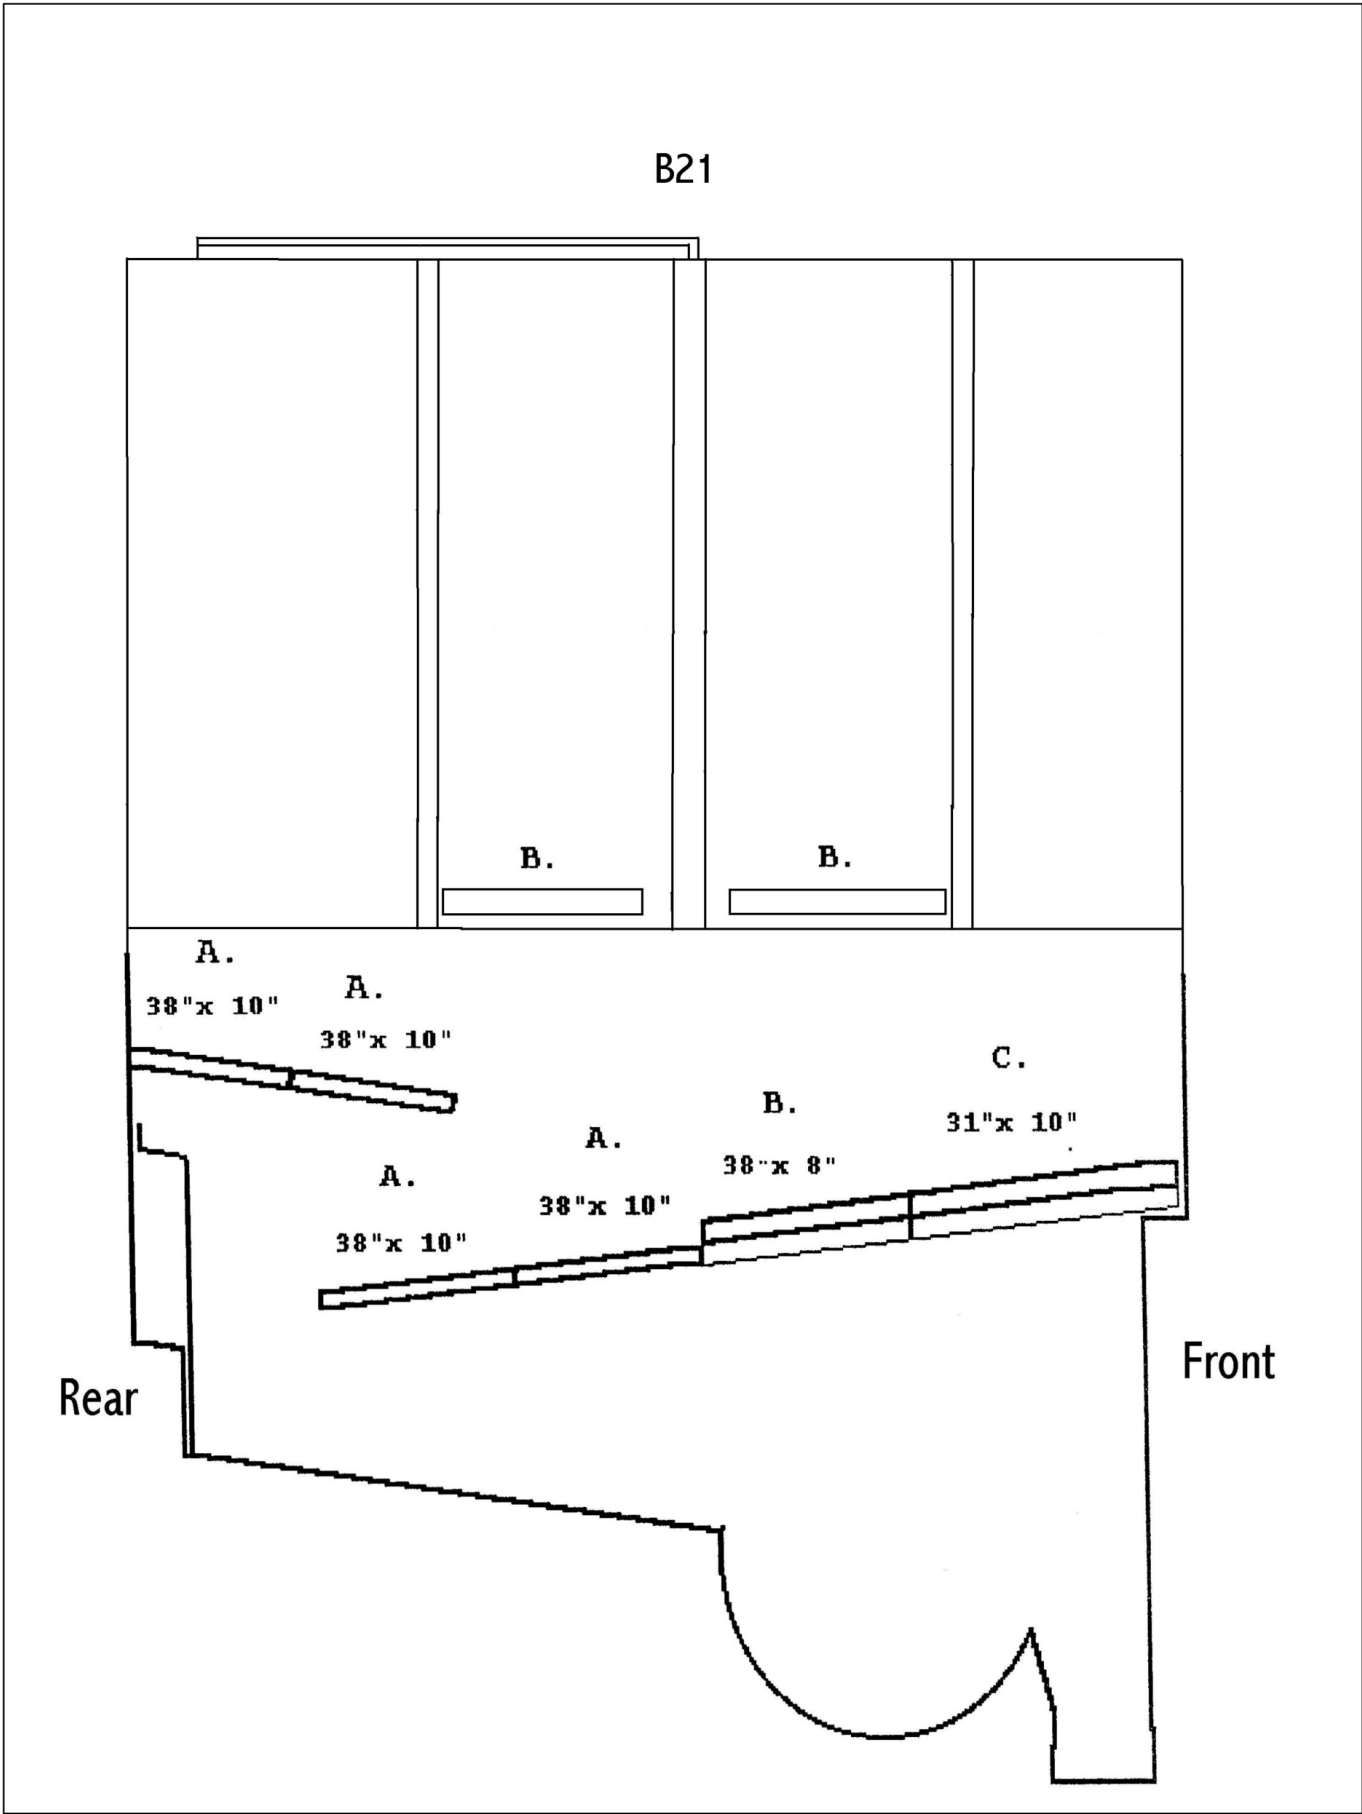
B21 board placement and alignment, side view of inside plastic dispenser tank
